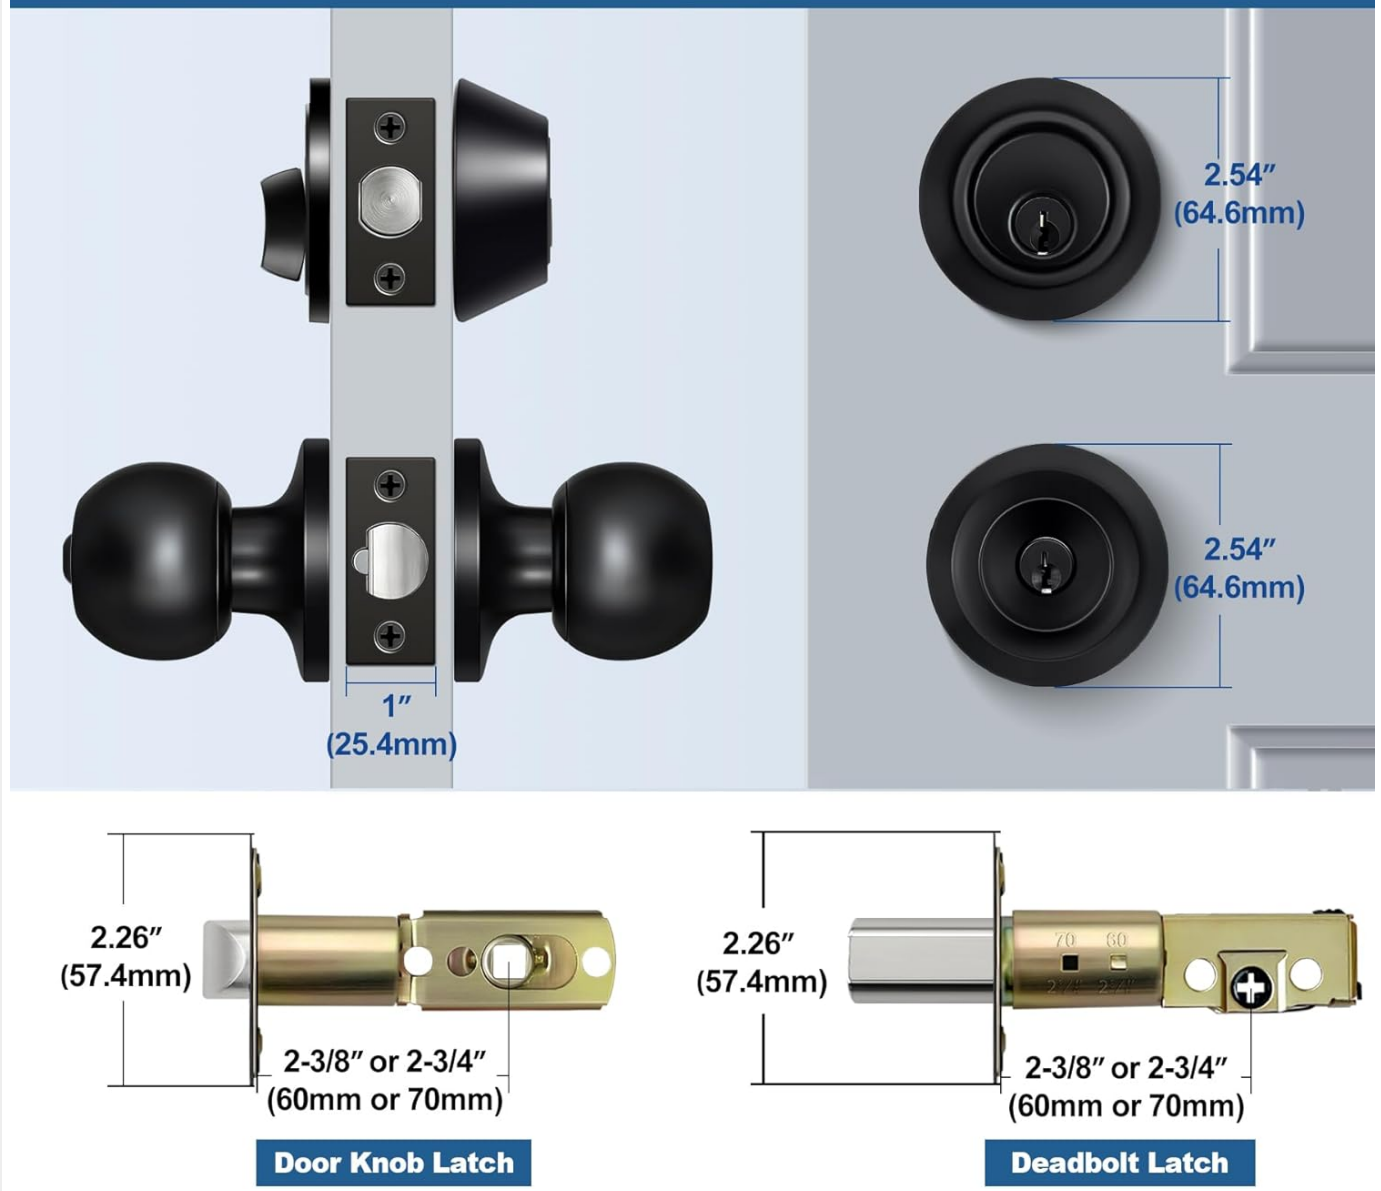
Product Dimensions for Deadbolt and Door Knob Components.
